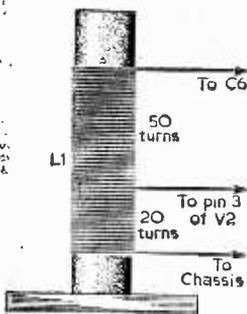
Details of the coil windings (on ½in. former with dust core).
